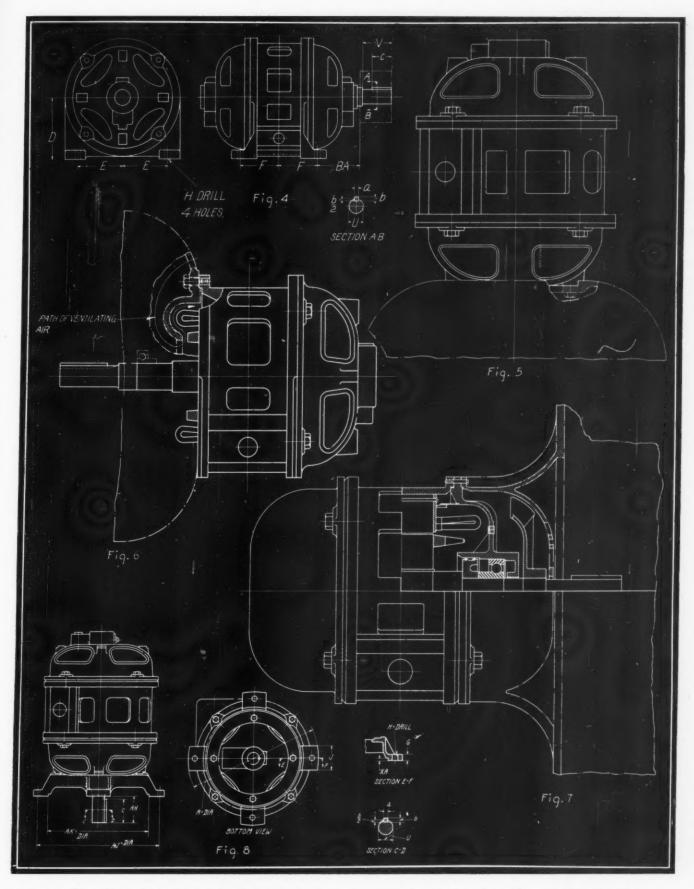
Mounting dimensions for horizontal motors. Fig. 5—Intimate end mounting for horizontal or vertical motors. Fig. 6—End mounting of electric motor where driven machine provides rear bearing and air guides. Fig. 7—End mounting of enclosed ventilated motor where driven machine forms rear blower casing. Fig. 8—Mounting dimensions for vertical motors
